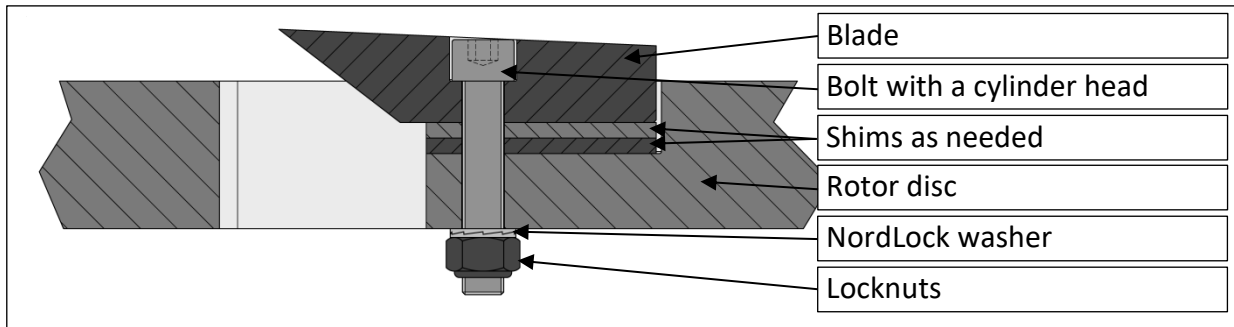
Setting the blade's cutting height, PC-3300-SEC and PC-3300-SIC
